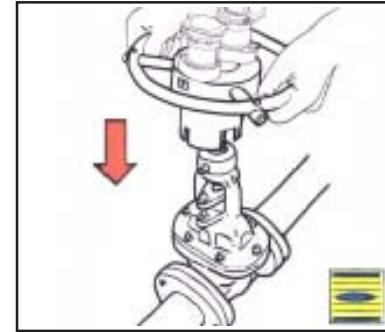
Position interlock on valve, engaging cutouts with valve yoke.
